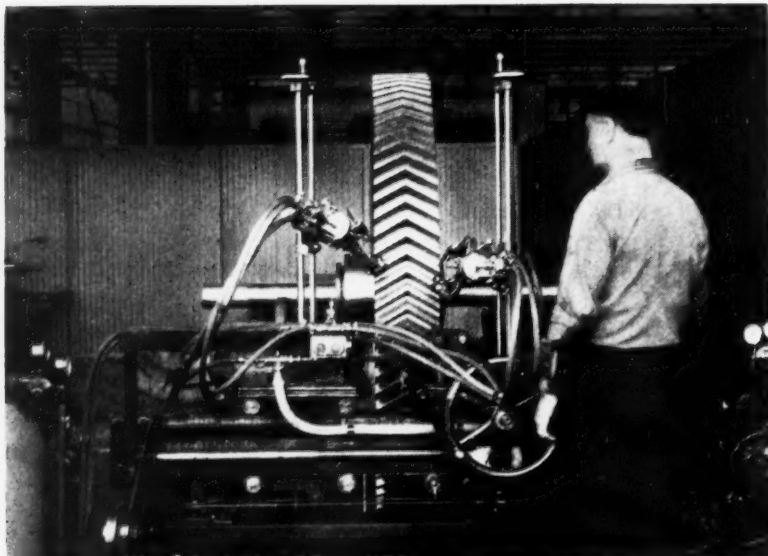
Torch-hardening Equipment Ready to be Applied to a Herringbone Gear
